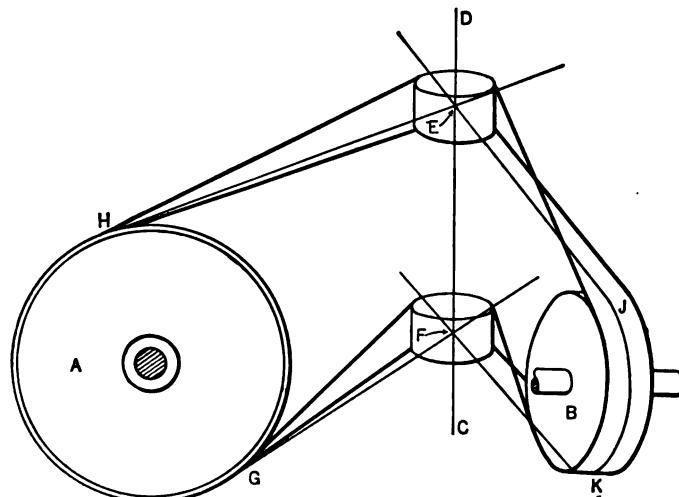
METHOD OF LOCATING GUIDE PULLEYS.
